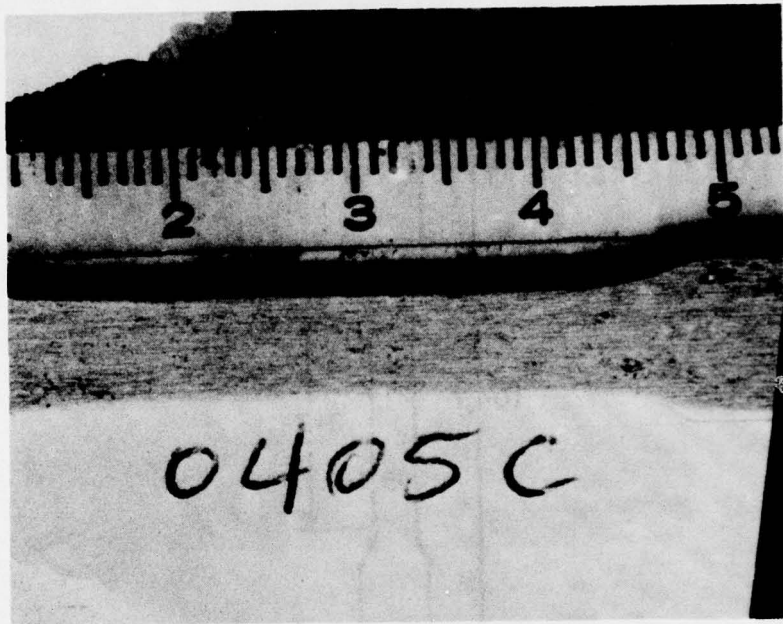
Corrosion pits remaining on surface of machined tensile test specimens
